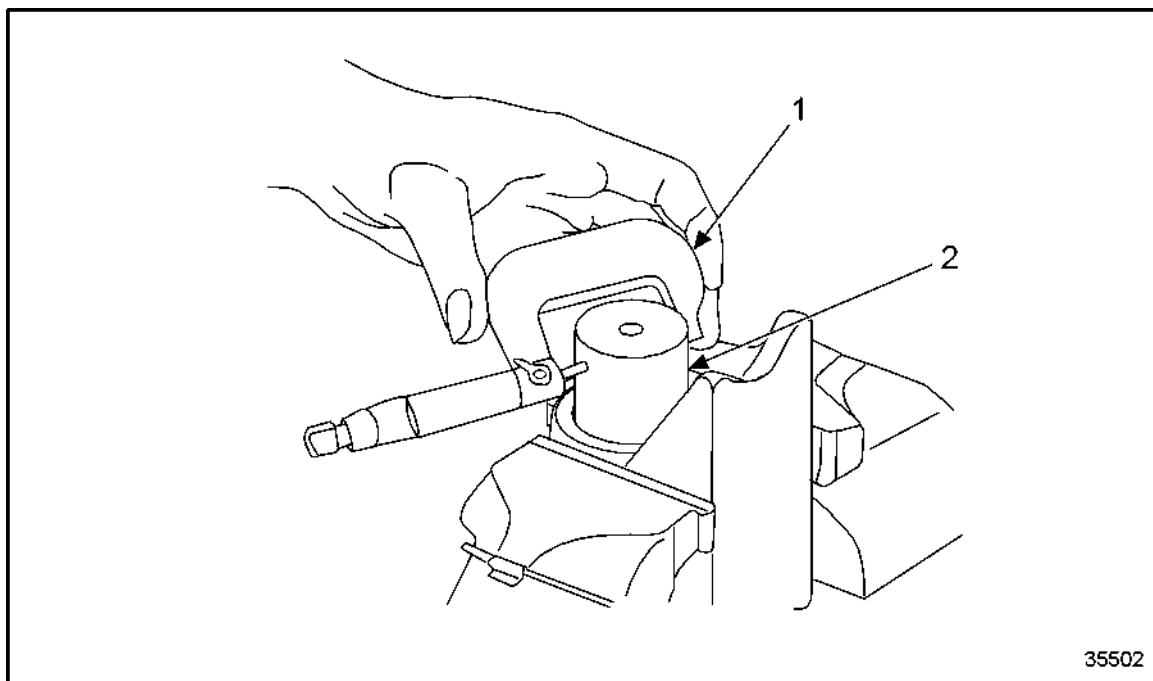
Measuring Diameter of Bushing Bore in Rocker Arm
